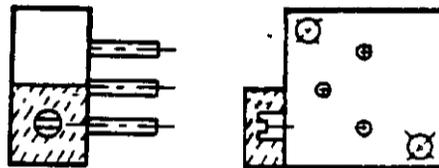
Outline drawing of a style RTR12 wirewound variable resistor.
